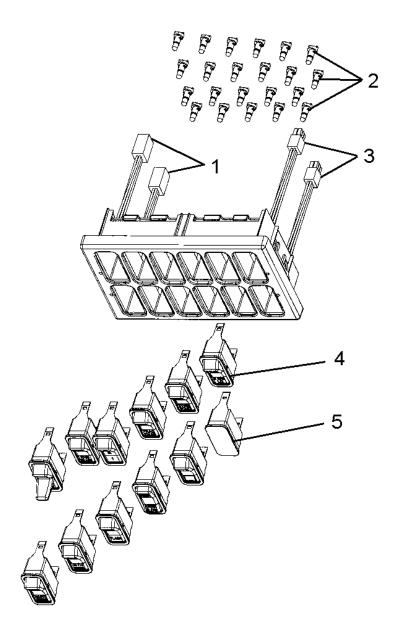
Switch Pack Exploded View (12 Pack Shown)
